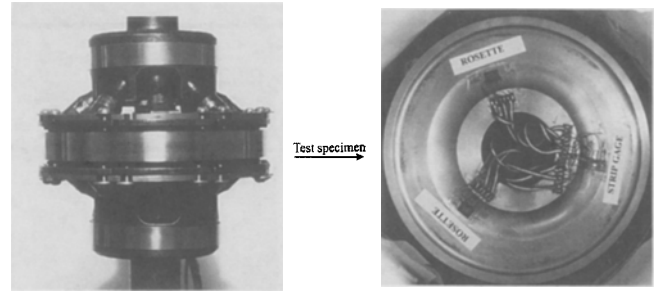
Photograph of the fixture and a disk specimen with strain gages
